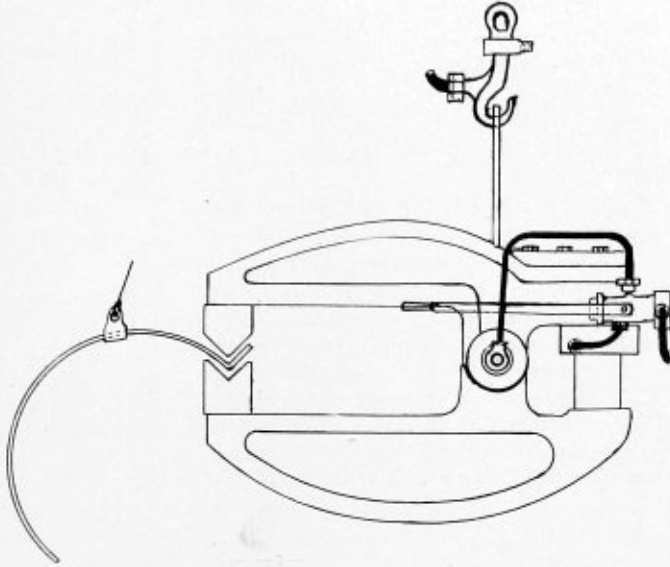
PORTABLE HYDRAULIC RIVETER USED FOR FLANGING.
